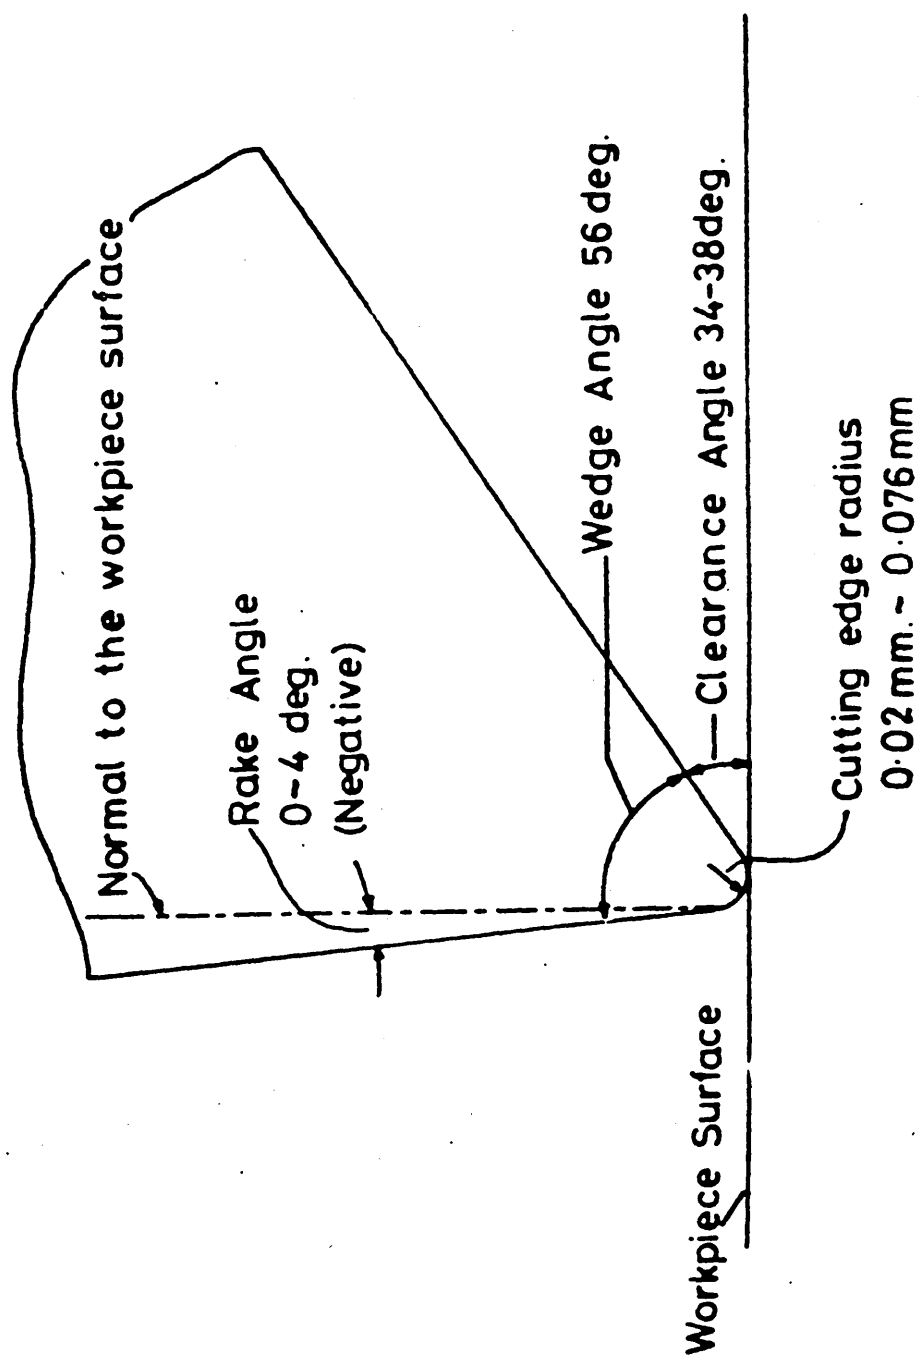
CUTTING EDGE GEOMETRY OF A HACKSAW BLADE TOOTH.
